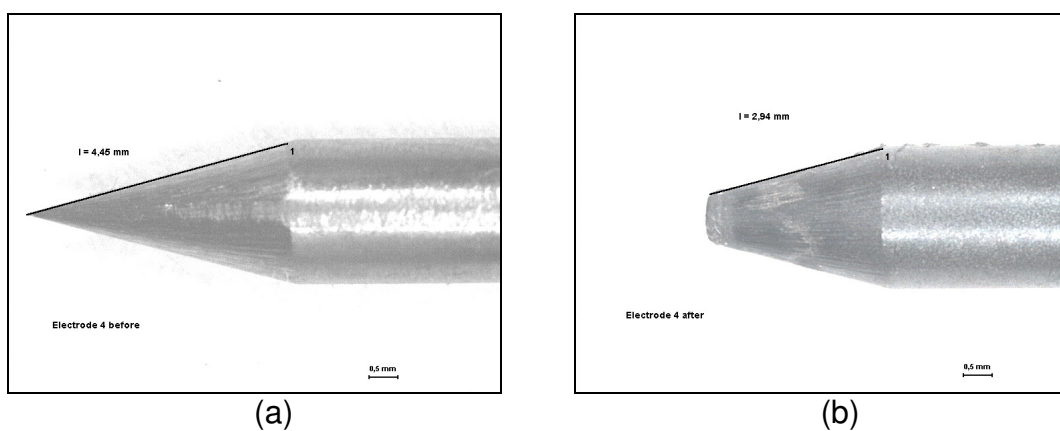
Electrode 4 used for experiment number 5: (a) before welding; (b) after welding.
